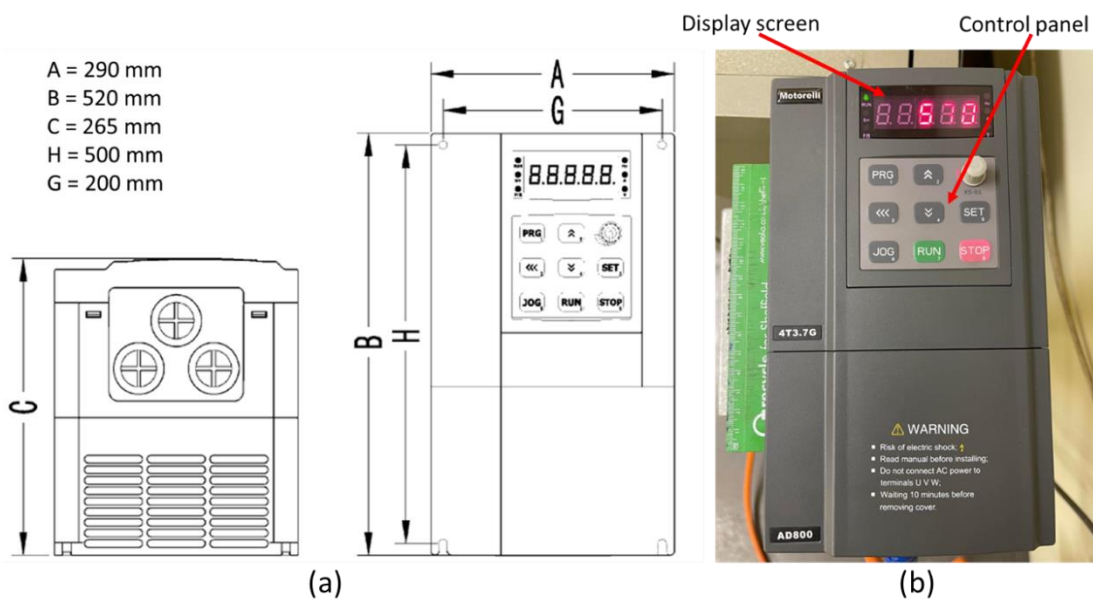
(a) A drawing of the variable speed drives (VSD) showing their dimensions and (b) a photograph of one of the variable speed drives used to make the rig.
